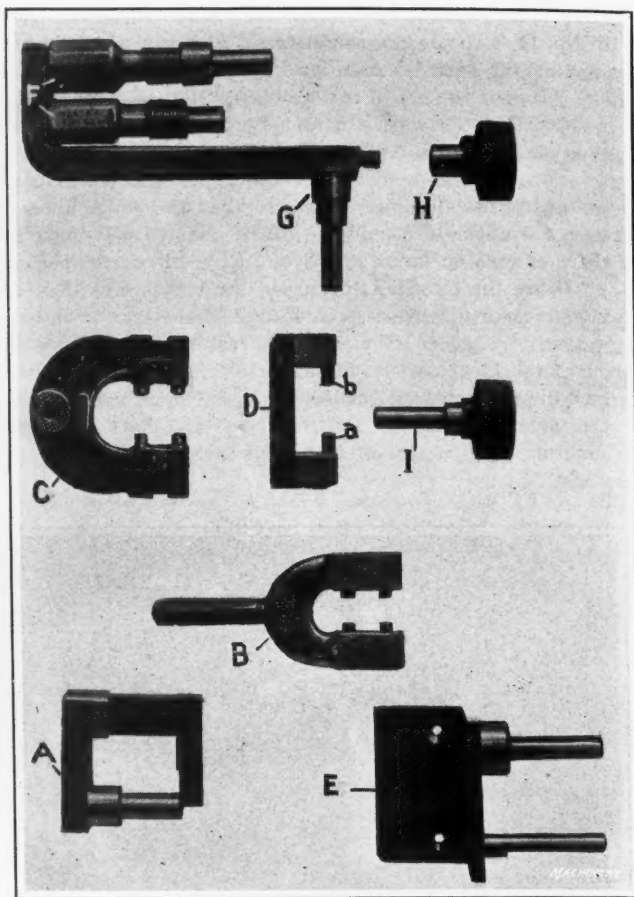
Set of "Go" and "Not Go" Type of Gages used for checking Dimensions of Fuse Base
